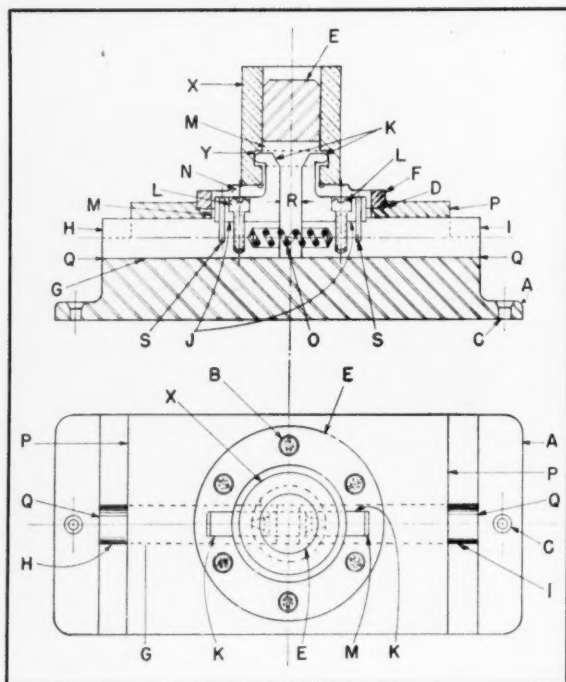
Drawing of gaging fixture for checking the diameter and concentricity of annular grooves
